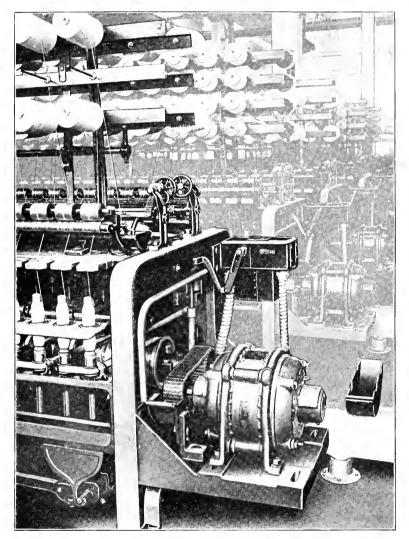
MOUNTING OF MOTOR AND CHAIN DRIVE IN TEXTILE MILL
